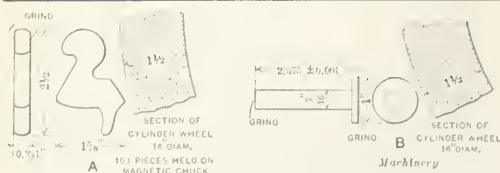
Examples of Surface Grinding on Rifle Hammers and Valve Push Rods
